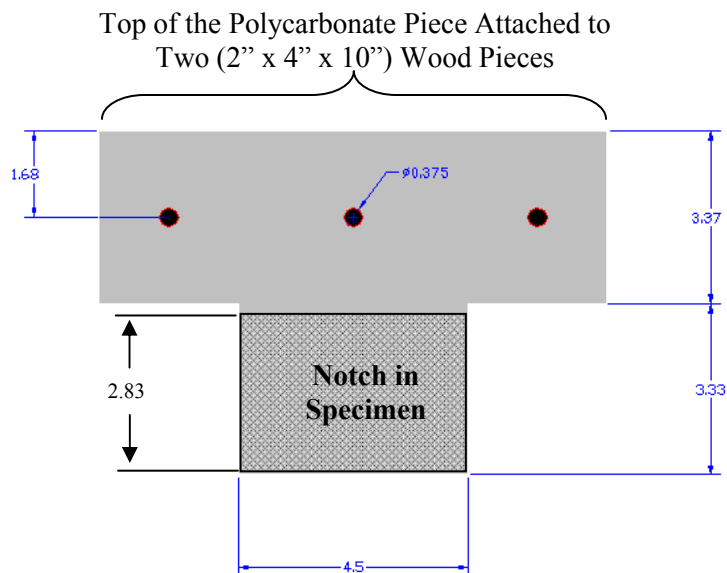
Front view of the polycarbonate notch (all dimensions in inches)
